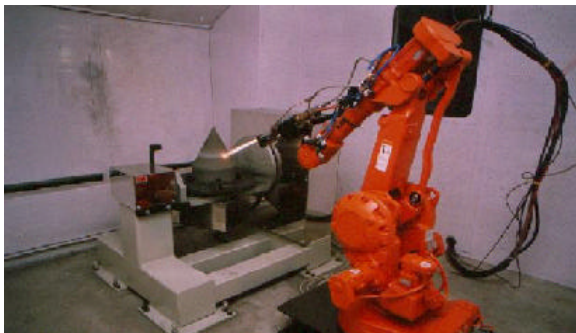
X – Y scanner spraying Francis turbine lower ring gas the fuel gas.
